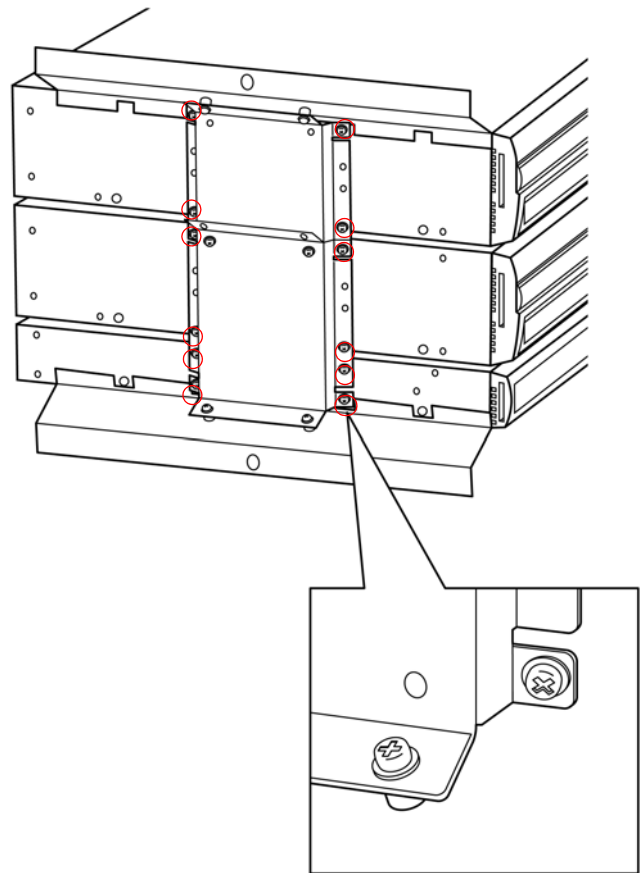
Attach Stand Mount Brackets to Chassis with Screws (CHS1U-AU+CHS2U-AUx2 Configuration)
